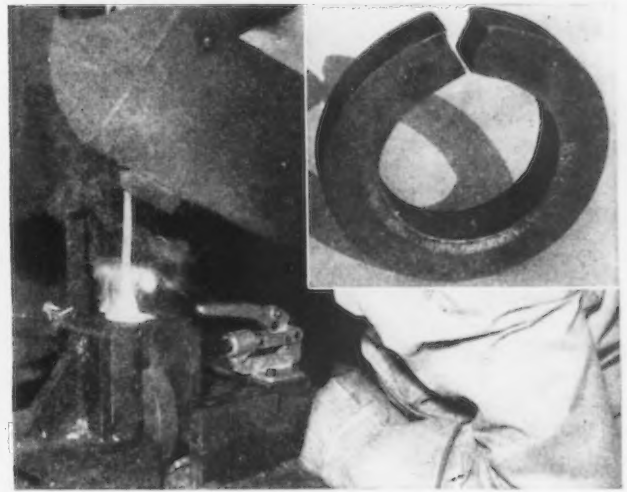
Butt welding mild steel ring with "Shield-Arc LH-70" using high amperage. Inset shows low carbon steel ring ready for butt welding.
